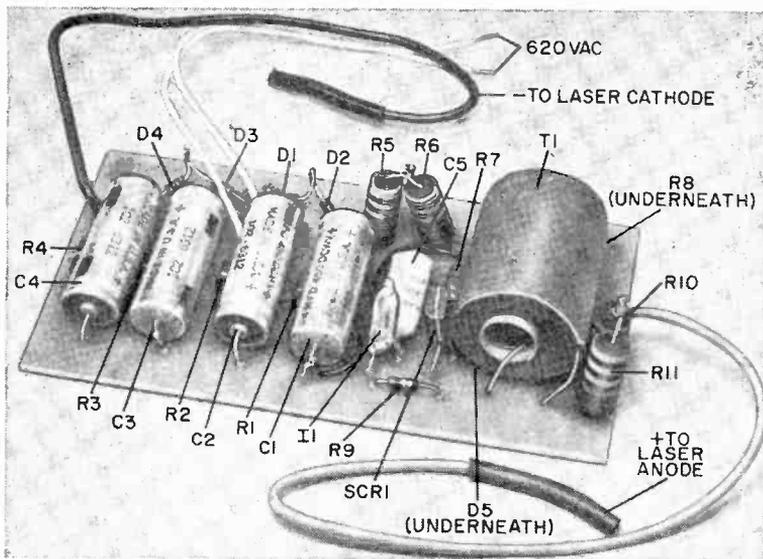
Component installation on the automatic supply PC board. Transformer T1 is an ordinary ignition coil that has plastic case removed.
